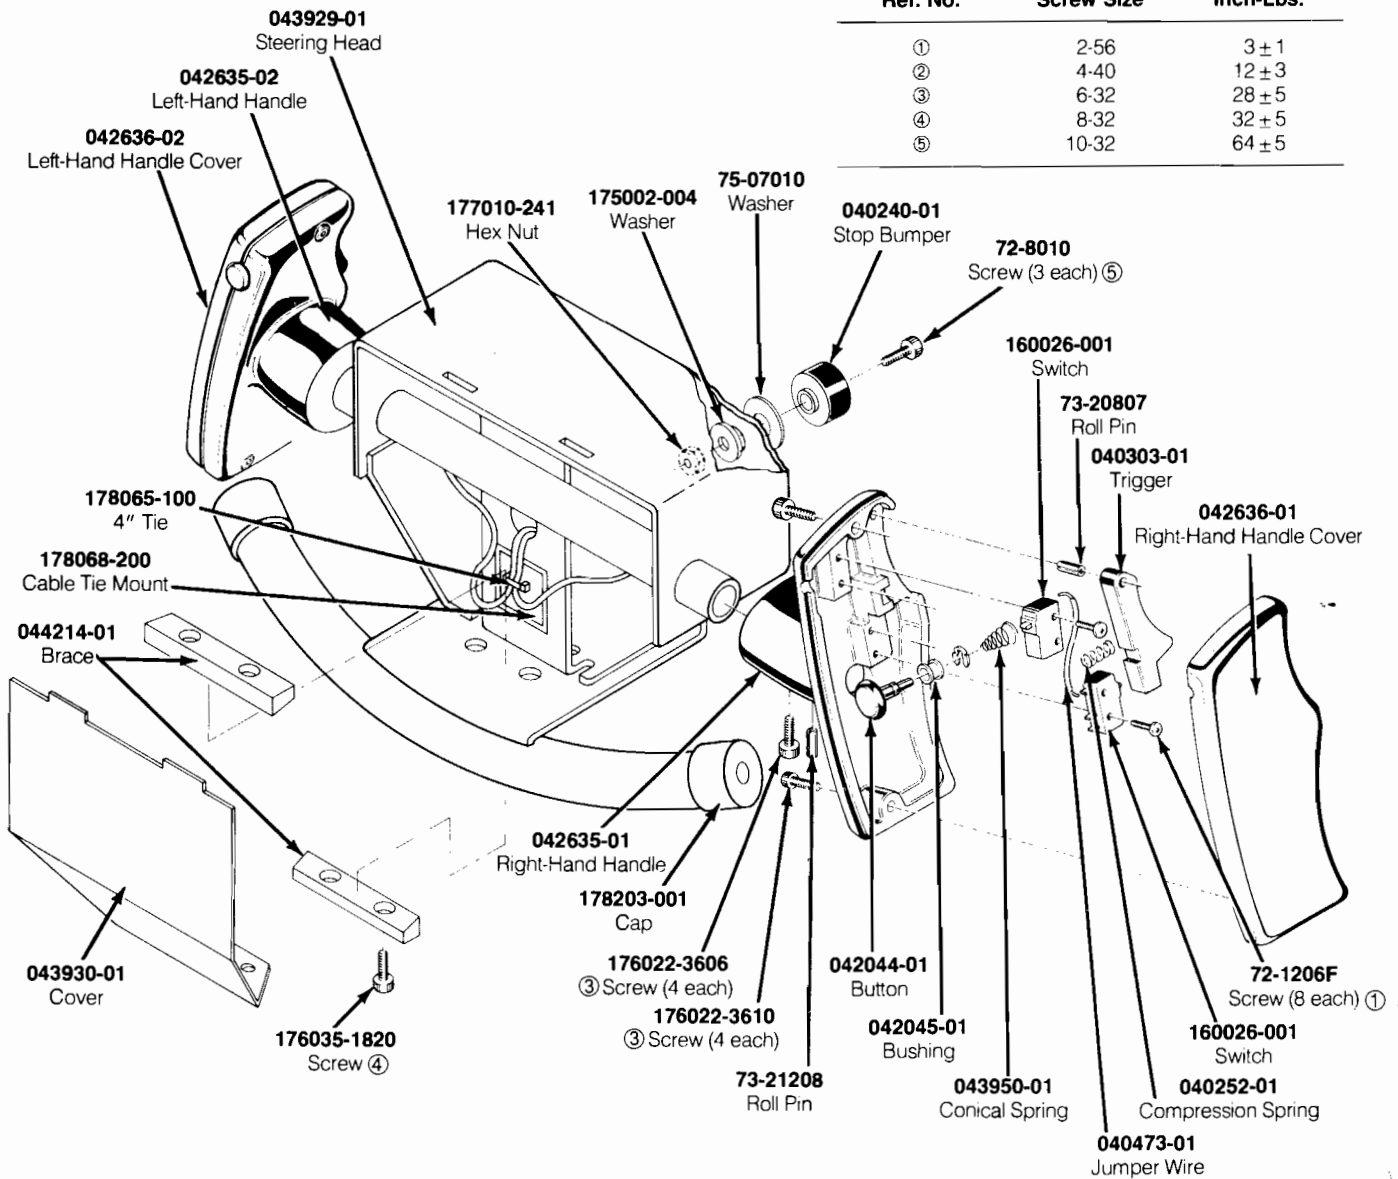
RTC Steering Control Disassembly and Lubrication
